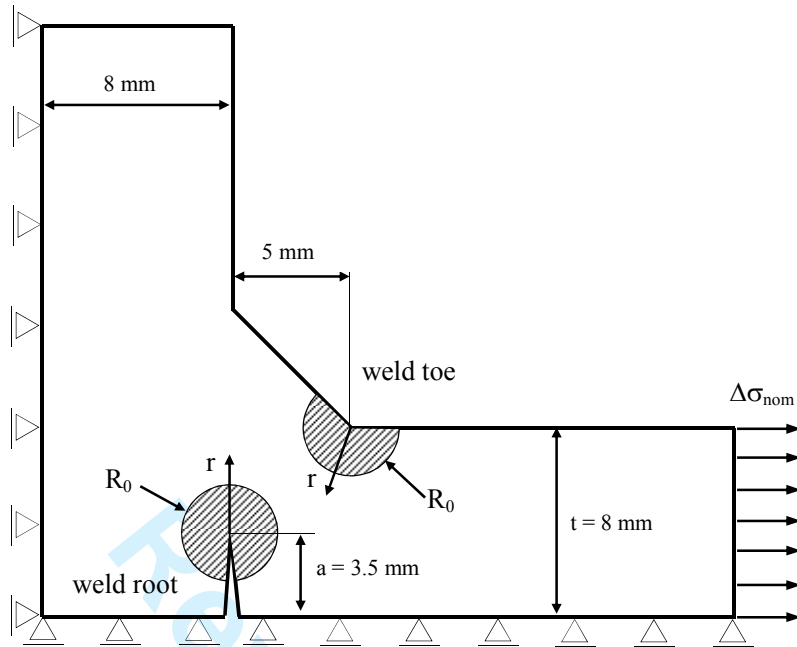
Geometry of the load-carrying steel weld joint tested in³⁰. Control volumes for the averaged SED evaluation at the weld toe and the weld root sides.
